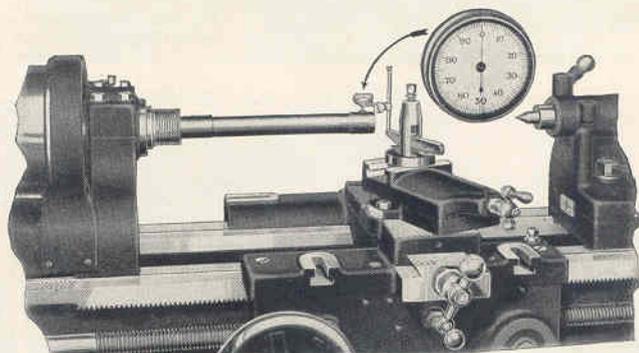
Testing Headstock Spindle. A test bar, 12 inches long, is fitted to the spindle. The dial indicator registers in ten thousandths of an inch.
